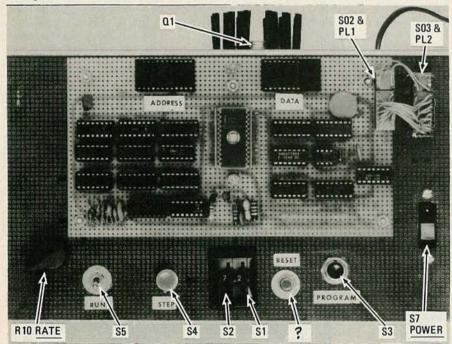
LOGIC/PROGRAMMING BOARD is mounted on standoffs above board holding switches and controls. Heat sink and Q1 are part of power supply.
